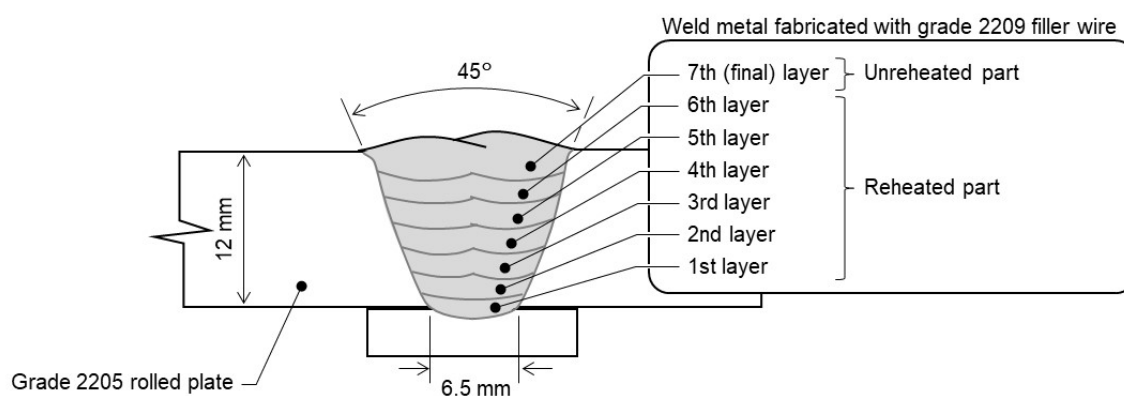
Schematic illustration of multi-layered welds.
